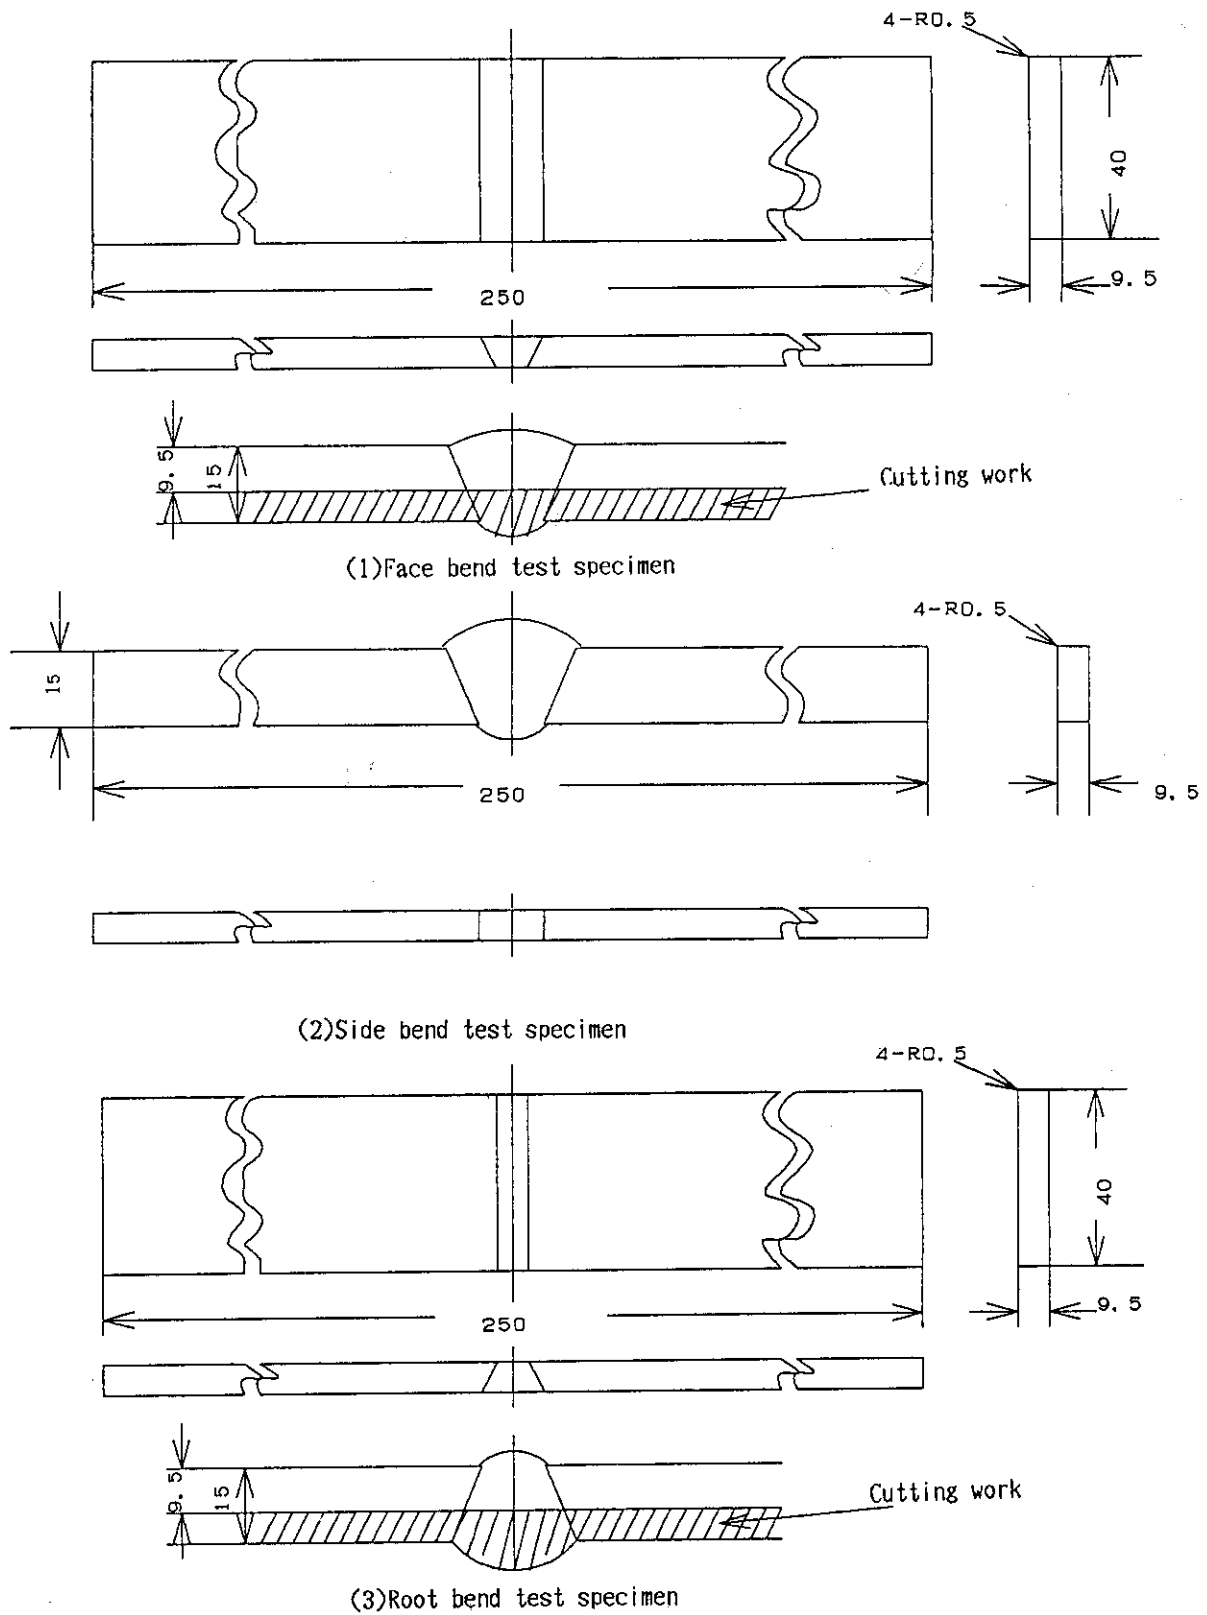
Geometry of guide bend test specimen for Hastelloy Alloy XR-II welded joint
